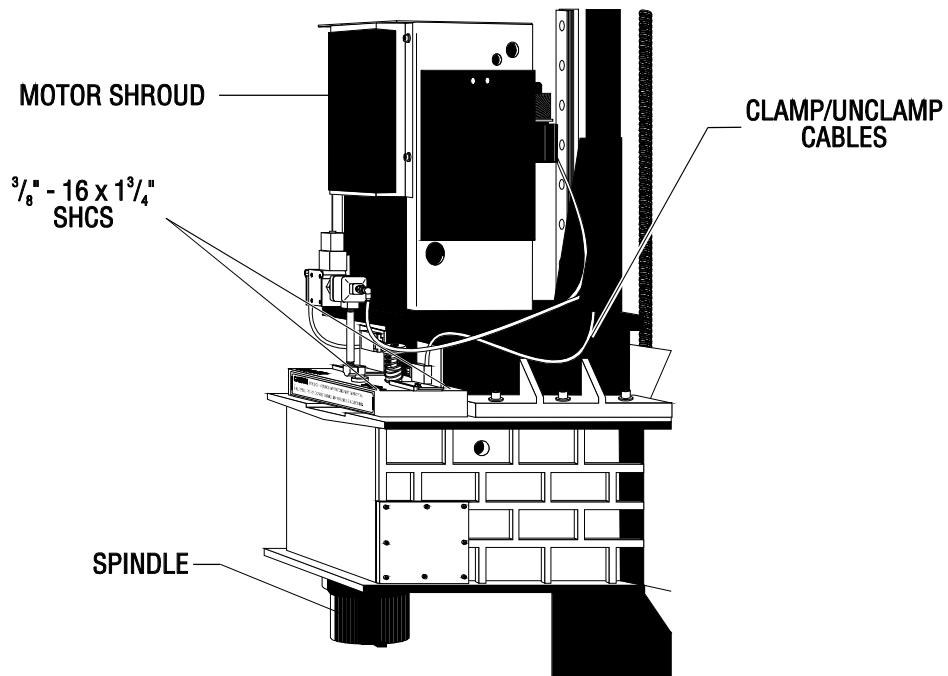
Spindle and headstock area shown with covers removed. VF-0 will have no transmission.
